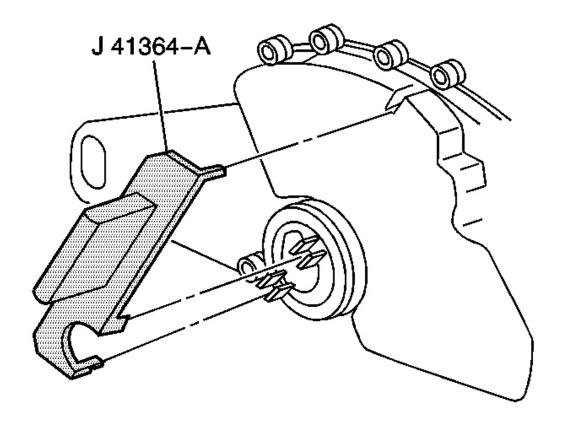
Identifying J 41364-A & PNP Switch Courtesy of GENERAL MOTORS CORP.
